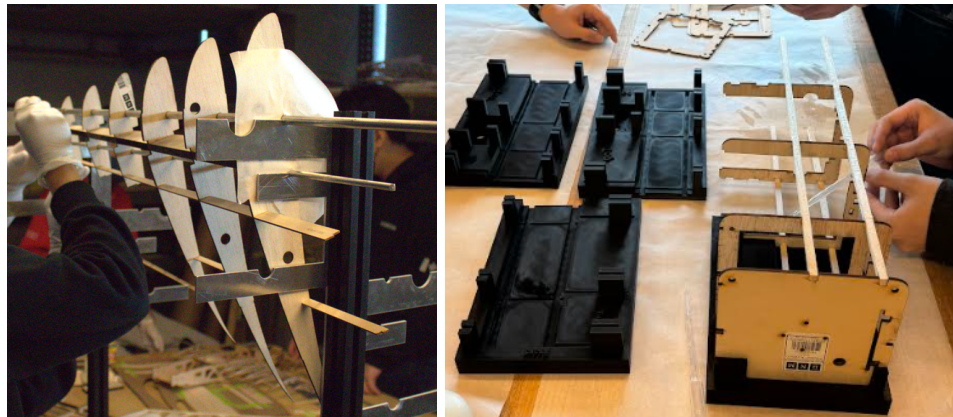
(left) Wing Manufacturing Using a Custom Alignment Jig & (right) Fuselage Manufacturing Using a Custom Jig
